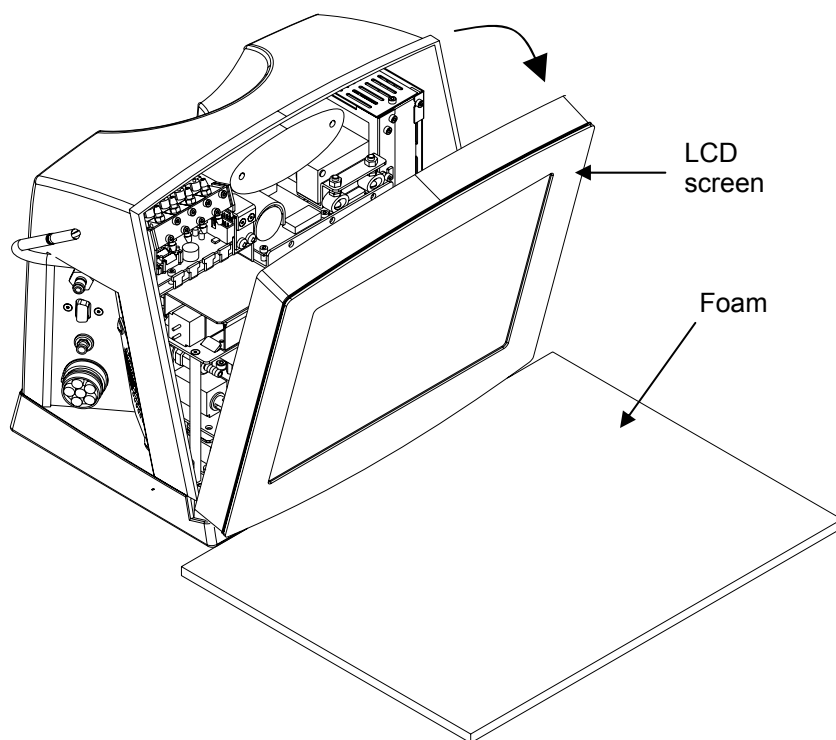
Disassembly cabinet – loosen LCD screen.
